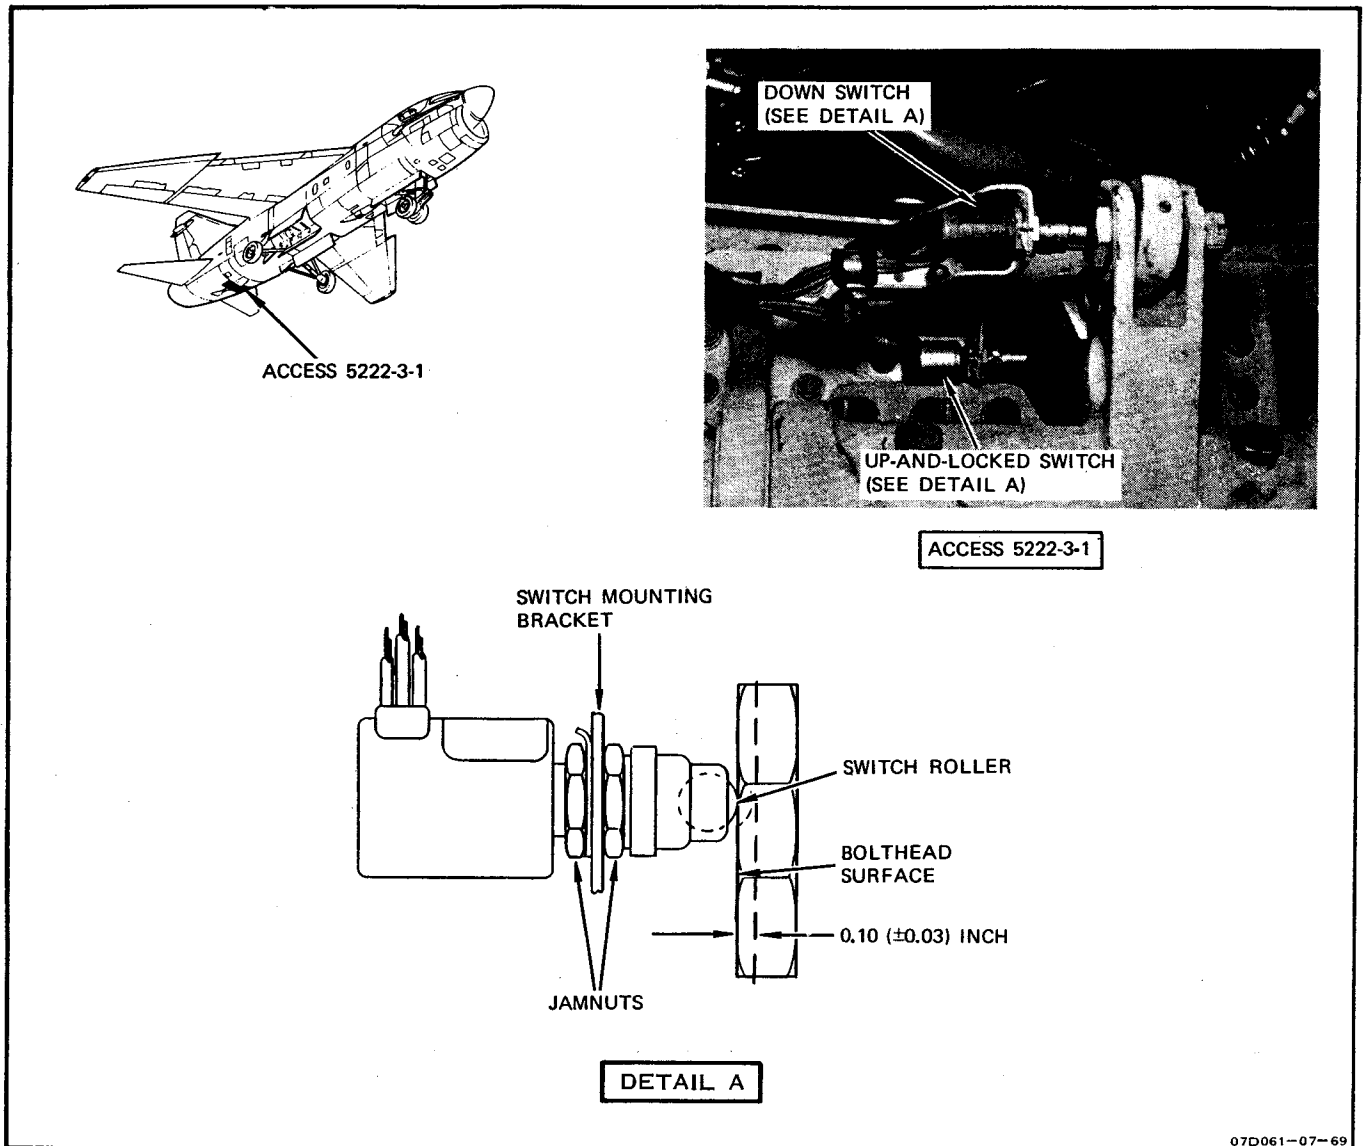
Up-and-Locked Switch and Down Switch Adjustment
